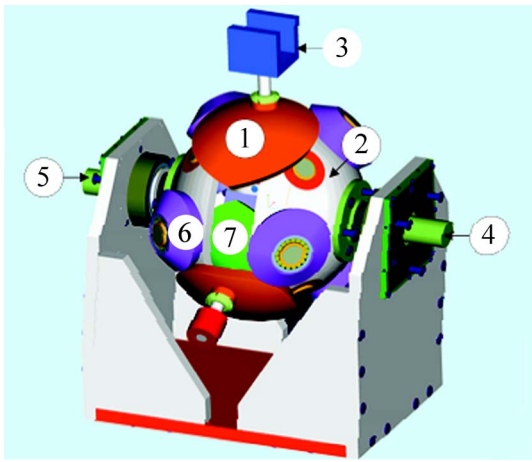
Gearless pitch-roll wrist based on cam-rollers: (1) outer cam; (2) roller-carrying disk; (3) gripper; (4) and (5) input shafts connected to the two motors; (6) roller; (7) inner cam
